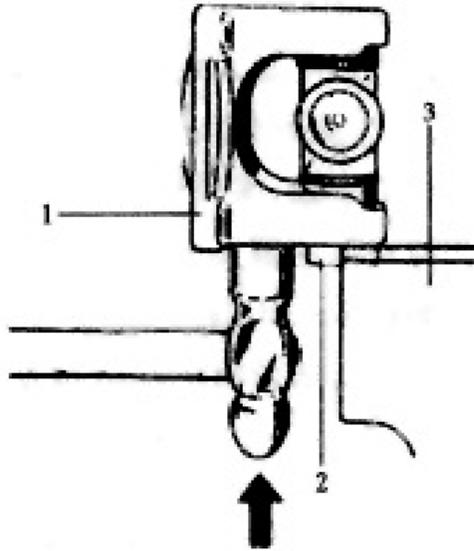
Disassemble bearing seat ring at flange yoke side
